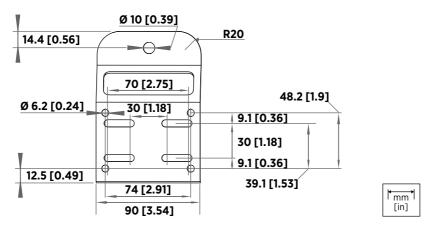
Flow-Through Adapter Mounting Plate Dimensions
